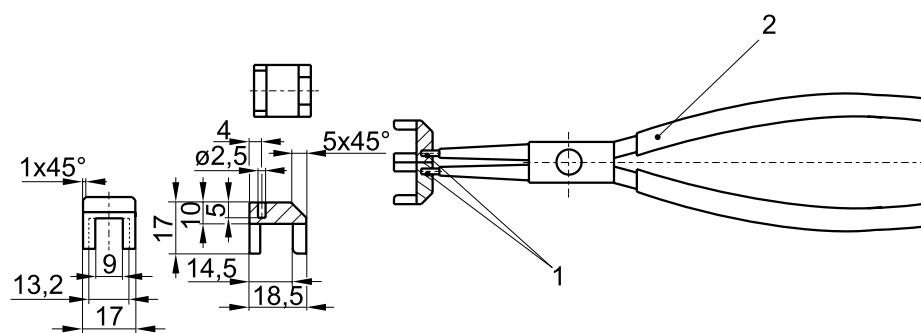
Tool for inserting the cable plugs for the temperature sensor at the cable harness
